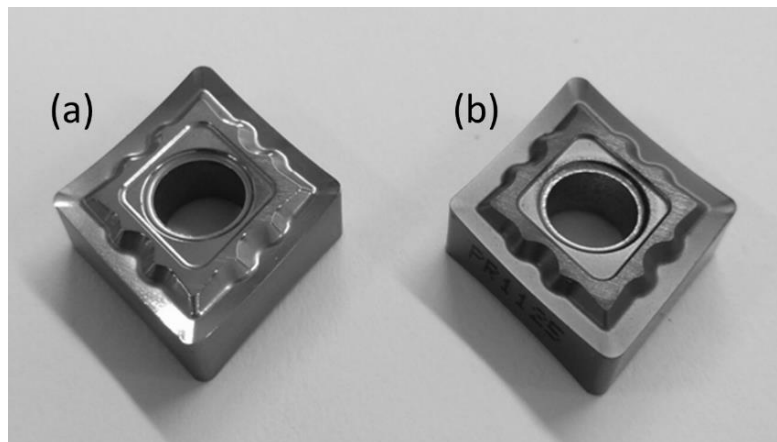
Cutting Tools (a) Uncoated Tungsten Carbide Cutting Tool (b) PVD-Coated Carbide Tool
